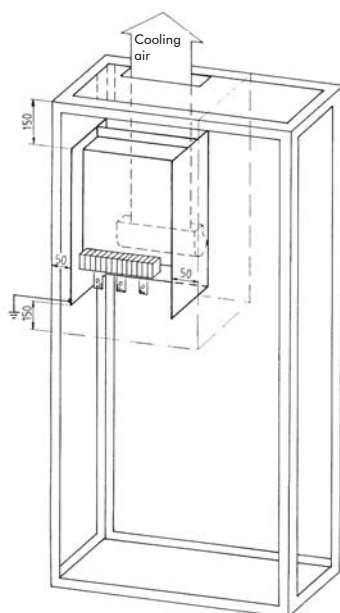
Minisemi D, cubicle mounted, dimensions in mm
